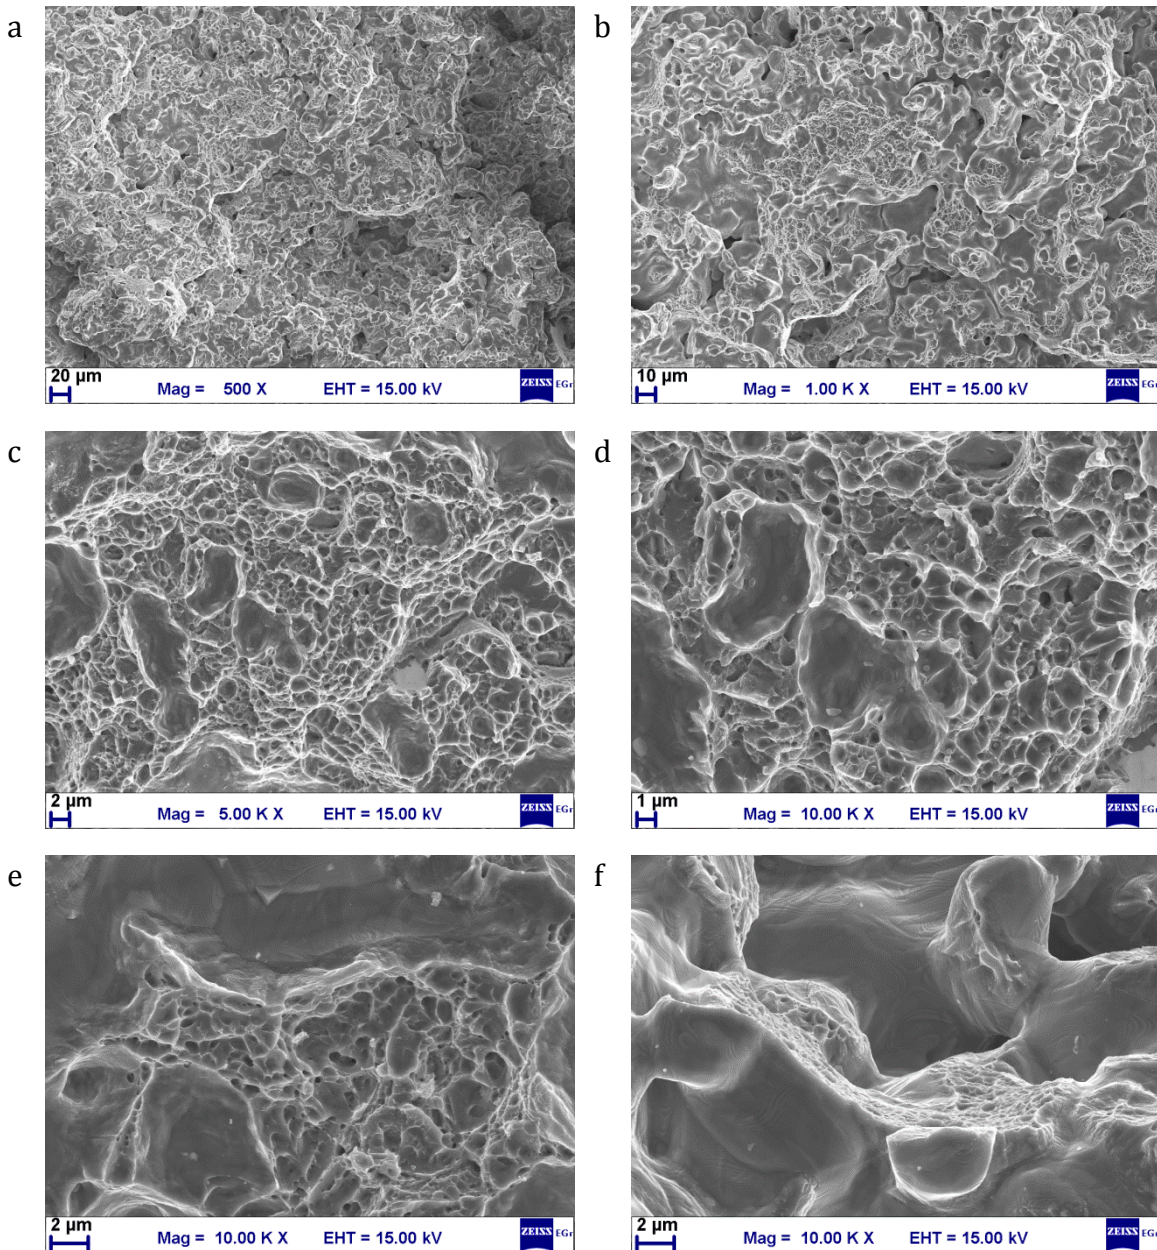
Fracture surface of DHP-DC-T200 specimen showing roughness of the fracture surface (a, b) and main fracture micro-mechanisms, namely interparticle(c-e) and transparticle dimple ductile fracture (f).
